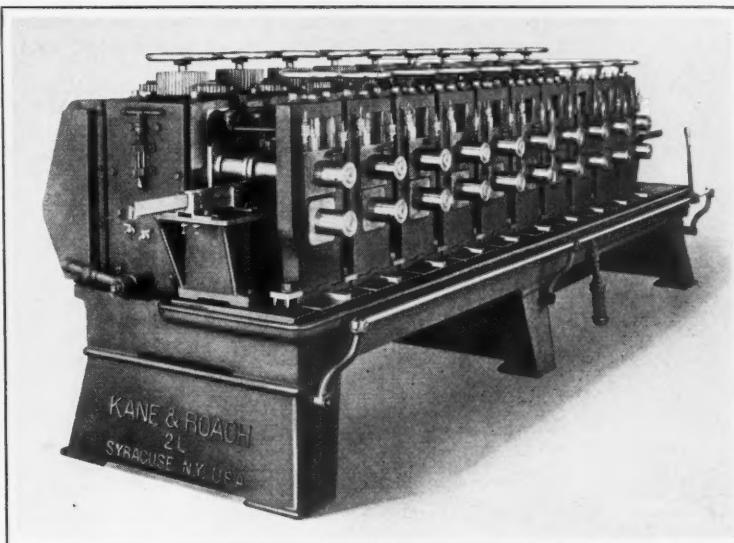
Forming Machine of the Same Basic Design as that in Fig. 1, but Equipped for a Variety of Work
